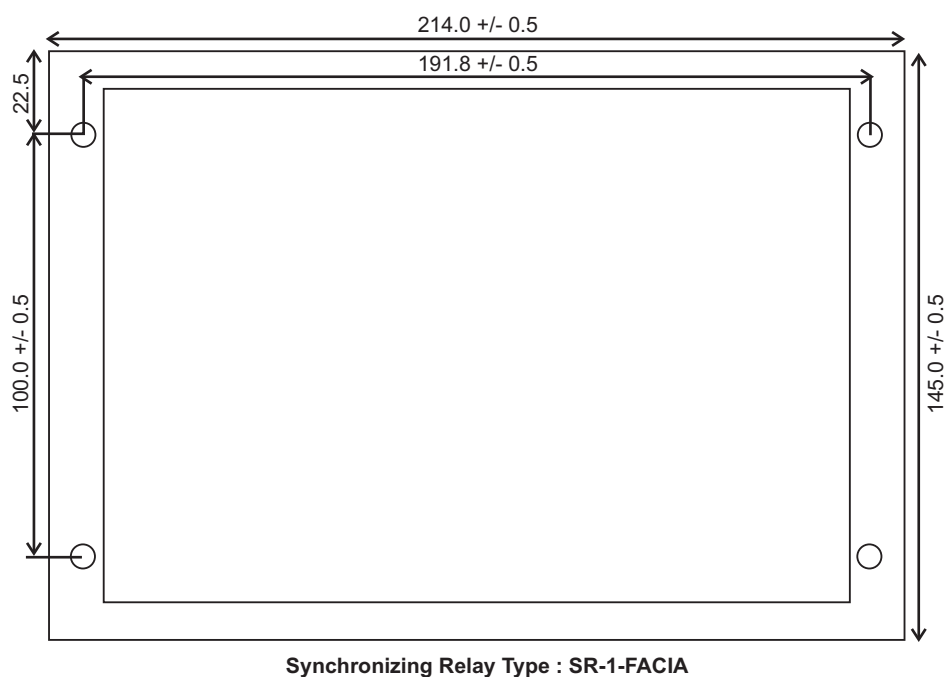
Panel Cut-out : 182 x 144 Installation Depth : 80 All dimensions in mm
